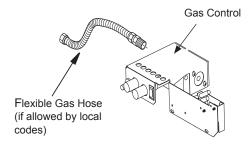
Attaching Flexible Gas Hose to Heater Gas Regulator
